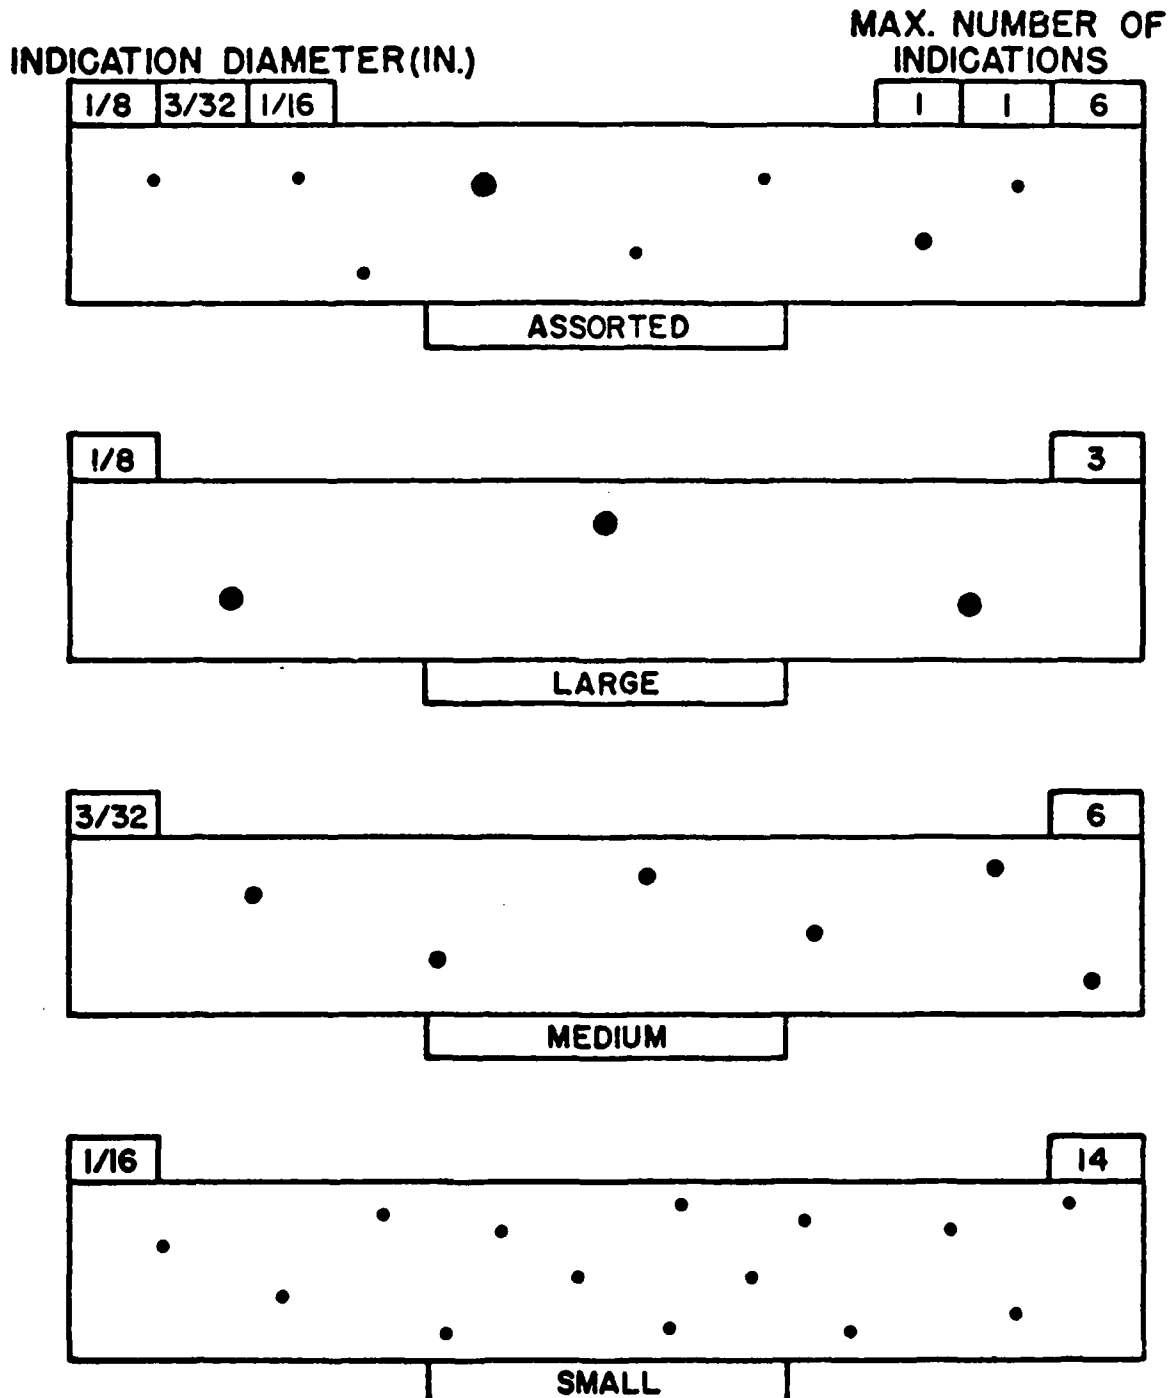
Class 3 Weld Surface Inspection Standards for Scattered Rounded or Non-Linear Indications (Sheet 6 of 6).
